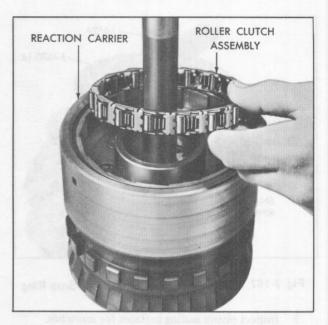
Installing Roller Clutch in Reaction Carrier
